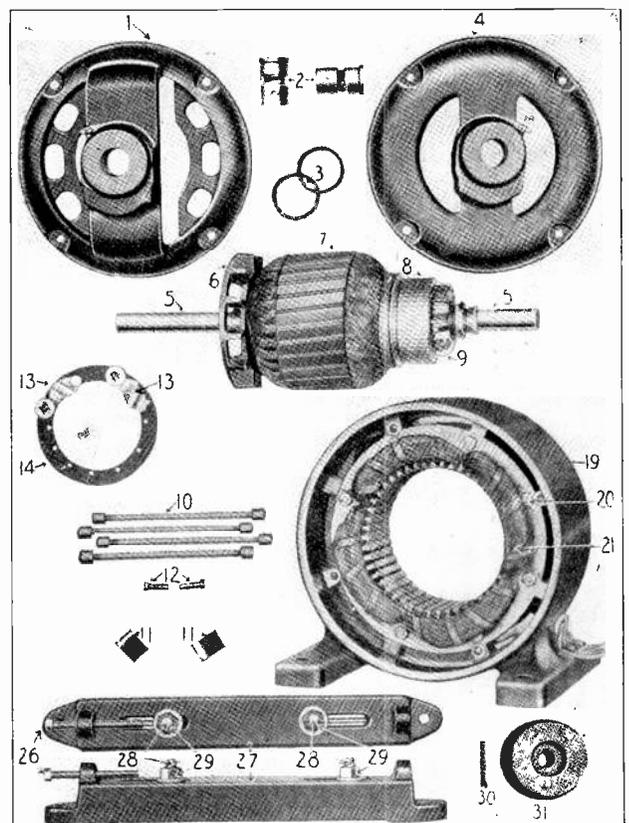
Disassembled view showing important parts of an A. C. single-phase repulsion motor.
